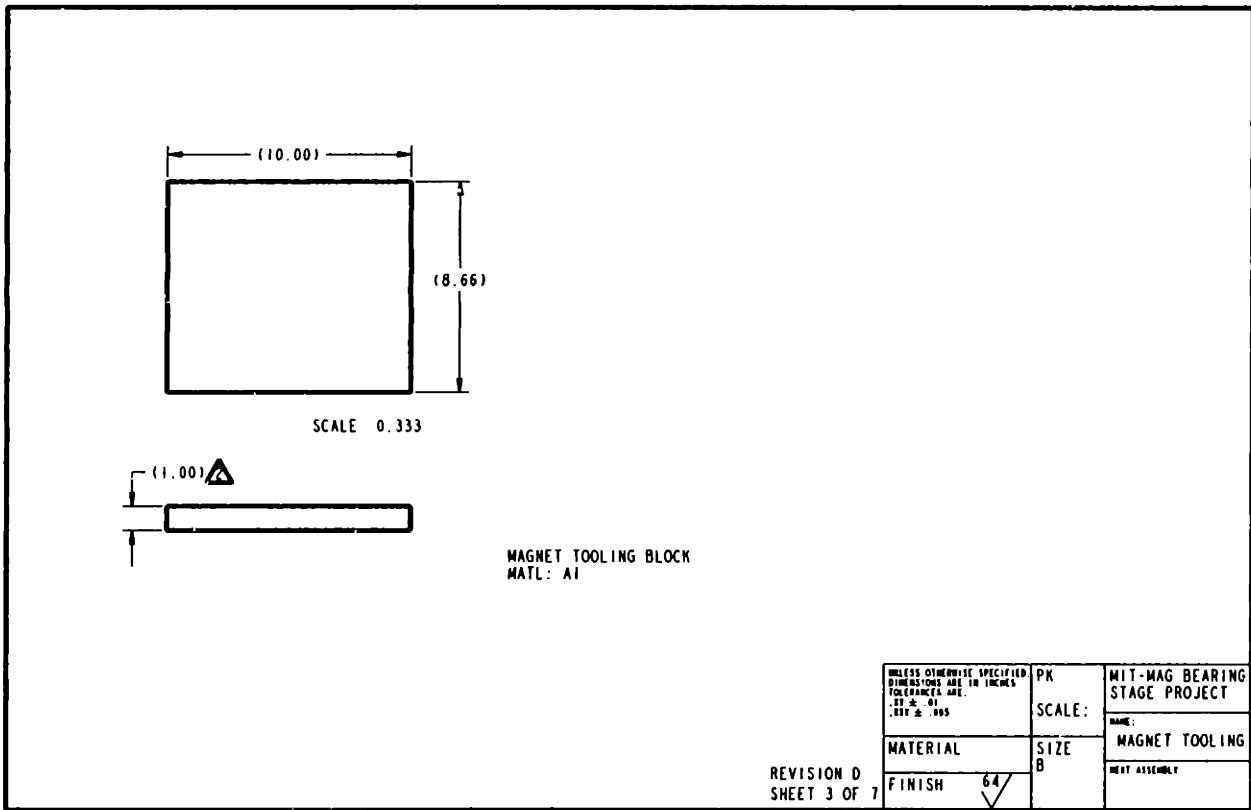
Tooling for assembling the prototype magnet array, continued I
